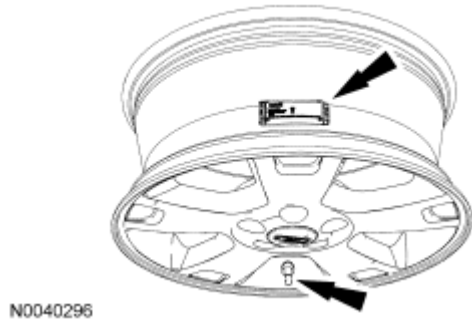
Locating Sensor & Cradle Into Wheel Drop Well
